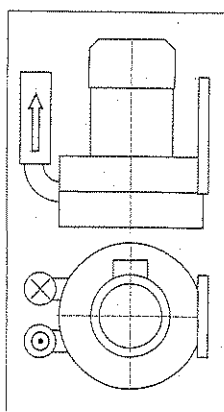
2BH1840-7J... (two-impeller pump-motor unit with double-flow design)
